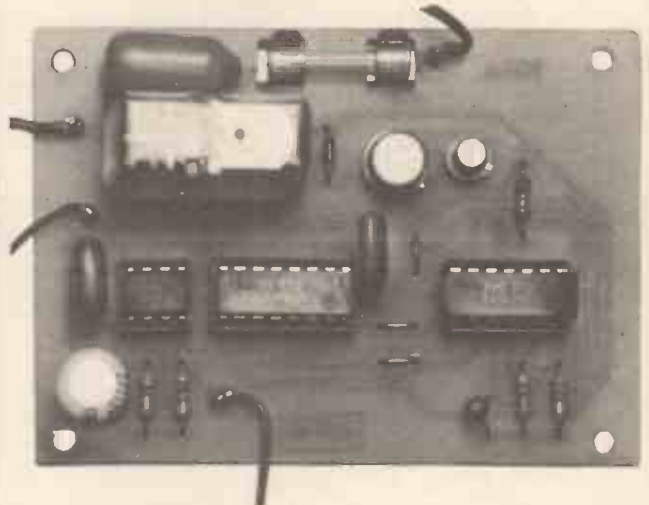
(left) The Security Vari-Light main control logic board component layout and full size track artwork. This board is mounted on spacers off the bottom of the case. Photograph (below) shows the finished p.c.b. assembly from the prototype model.
